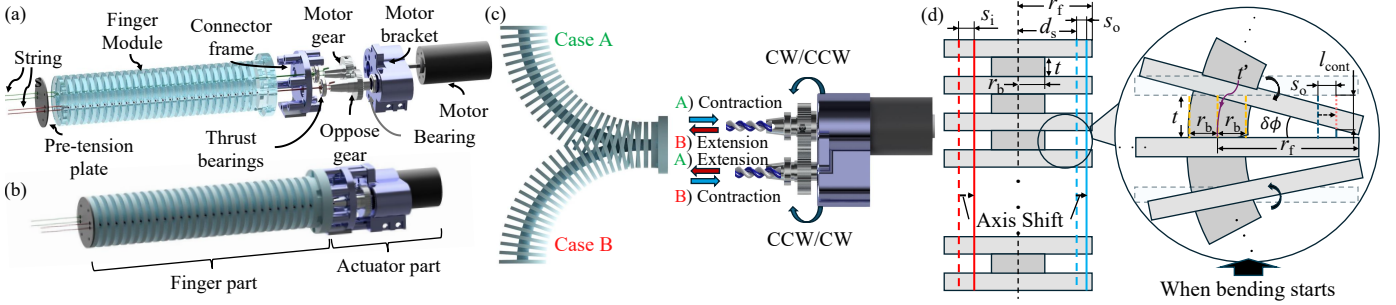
Detailed design of the continuum finger with bidirectional TSA module- (a) Exploded view, (b) Assembled view, (c) Upper view schematic about how motor and gear rotation determines the direction of bending. (d) Schematic of the continuum finger's bending process and its parameters.
